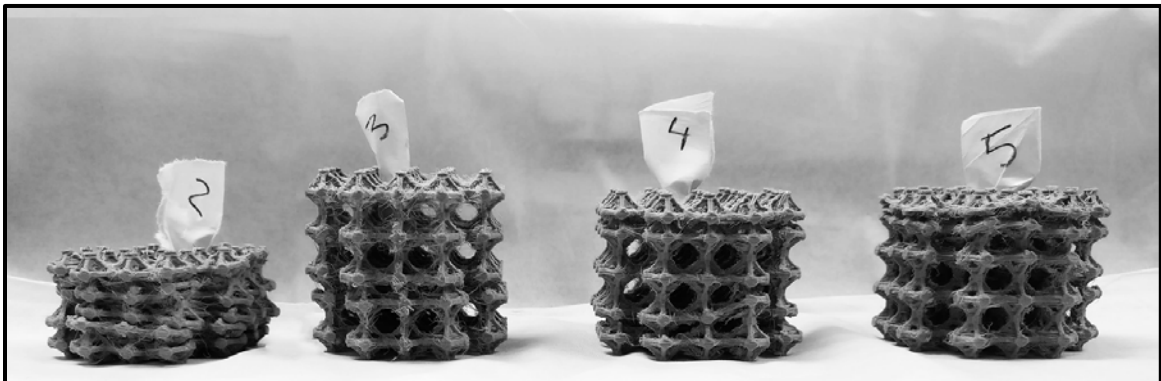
3D Printed Specimens after compressive testing.
